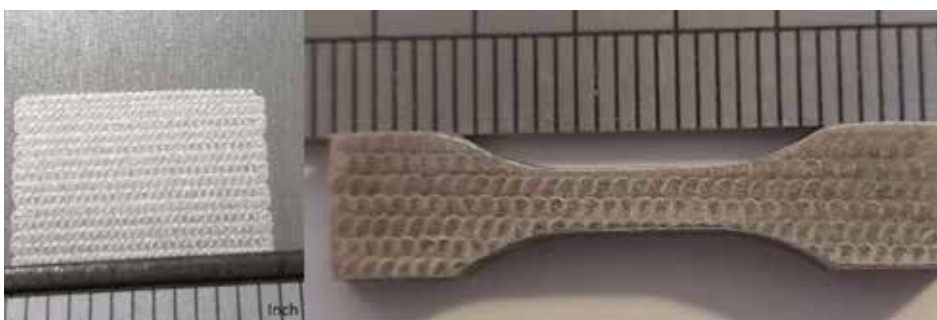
Examples of a laser shock peened surface of aluminium in (a) and Inconel 718 Additive manufactured specimen in (b), using the compact Bright-Beams LSP system.
